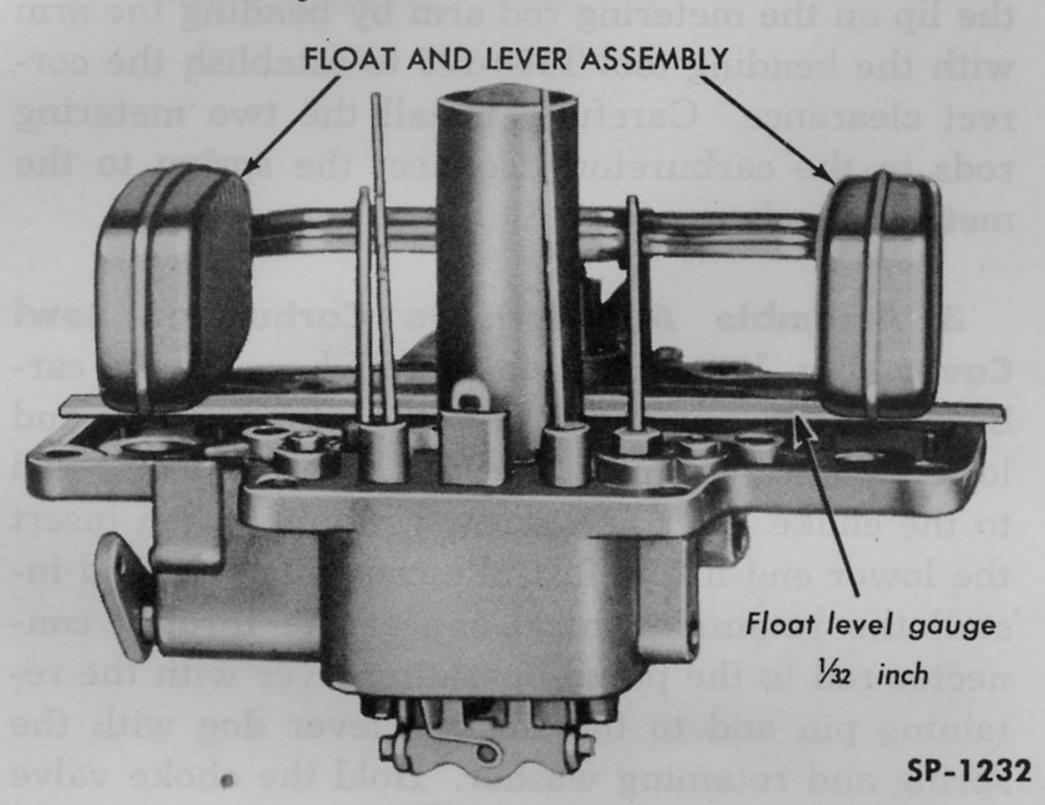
Float Level Adjustment on WCD-7235 Carburetor
